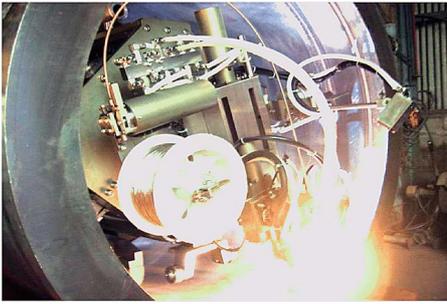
Remote automatic TIG weld testing performed on inner surface of outlet nozzle mock-up
